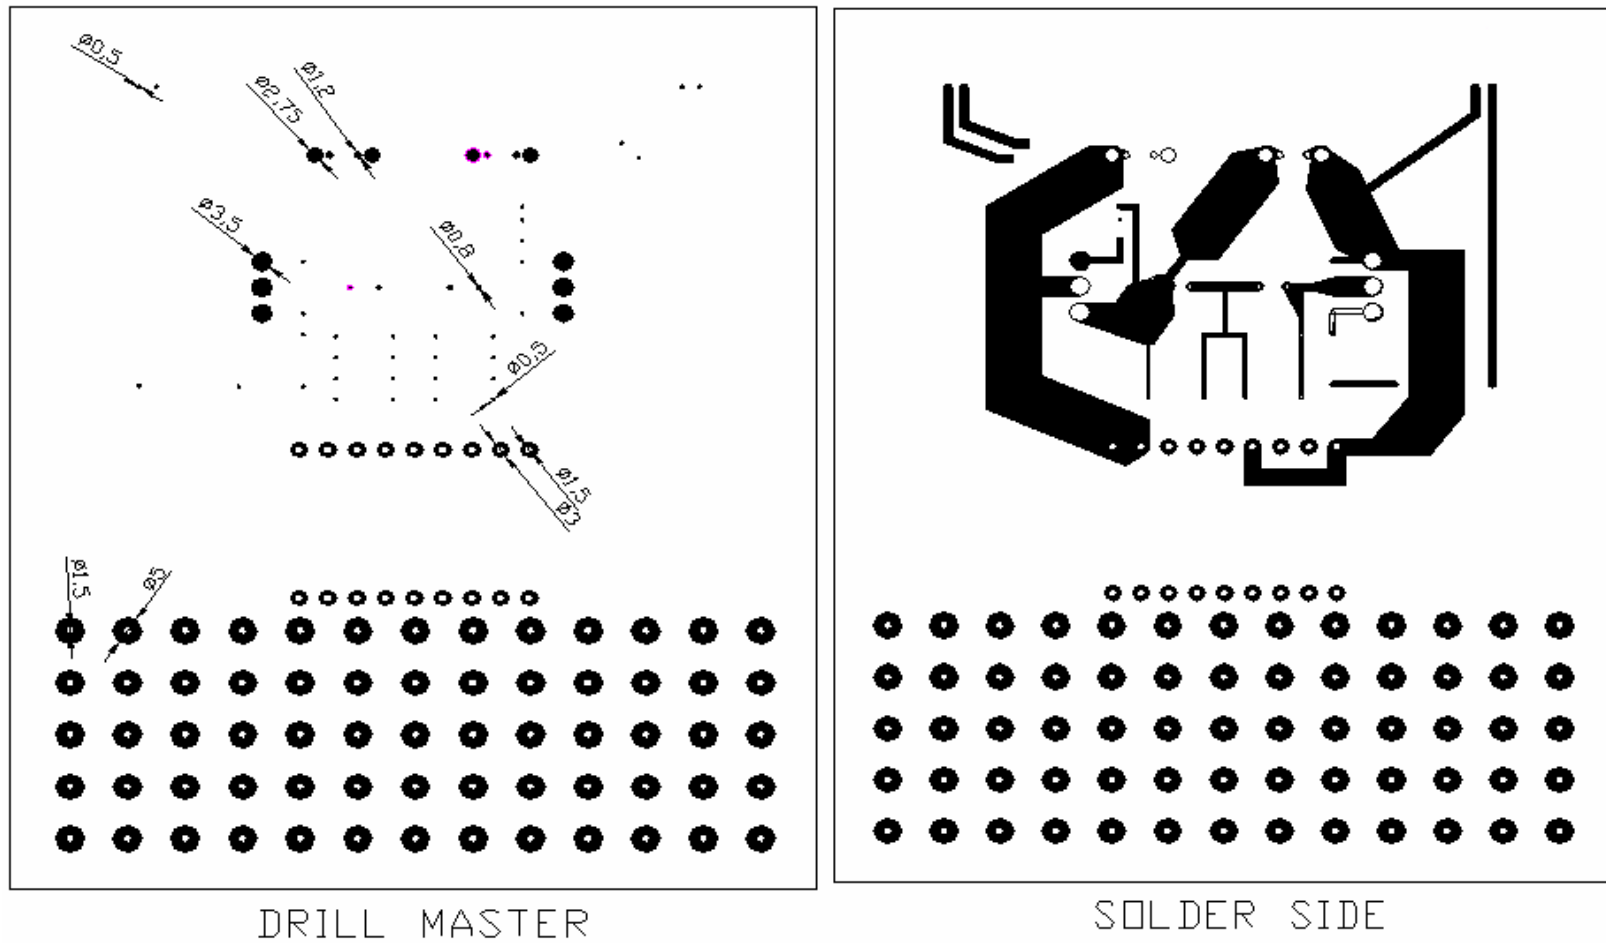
PCB Layout, Drill master & Solder side
